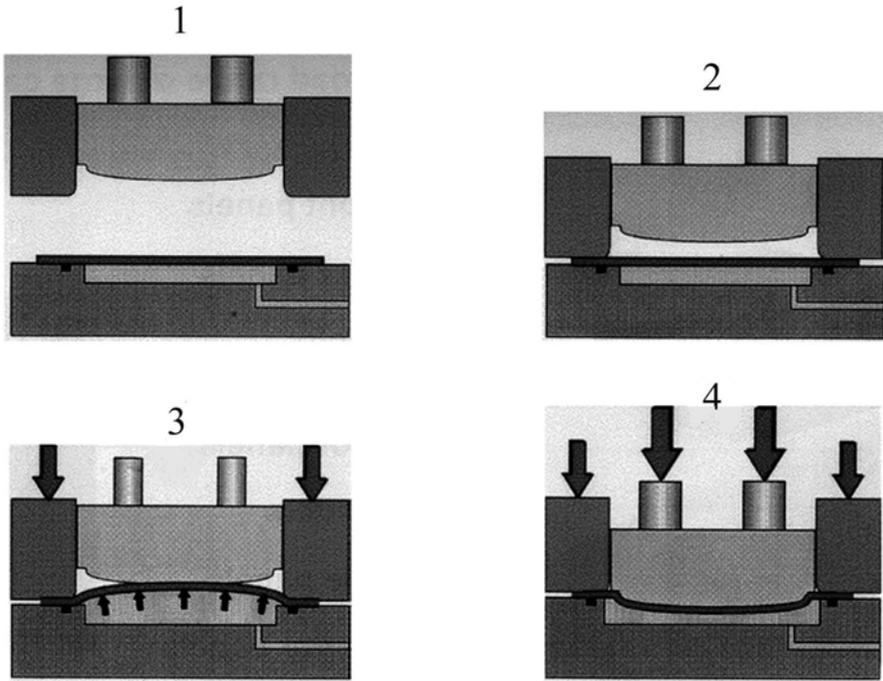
Sheet hydroforming: blank positioning (1); blank holder closing (2); fluid pressurization (3); punch stroke (4).
